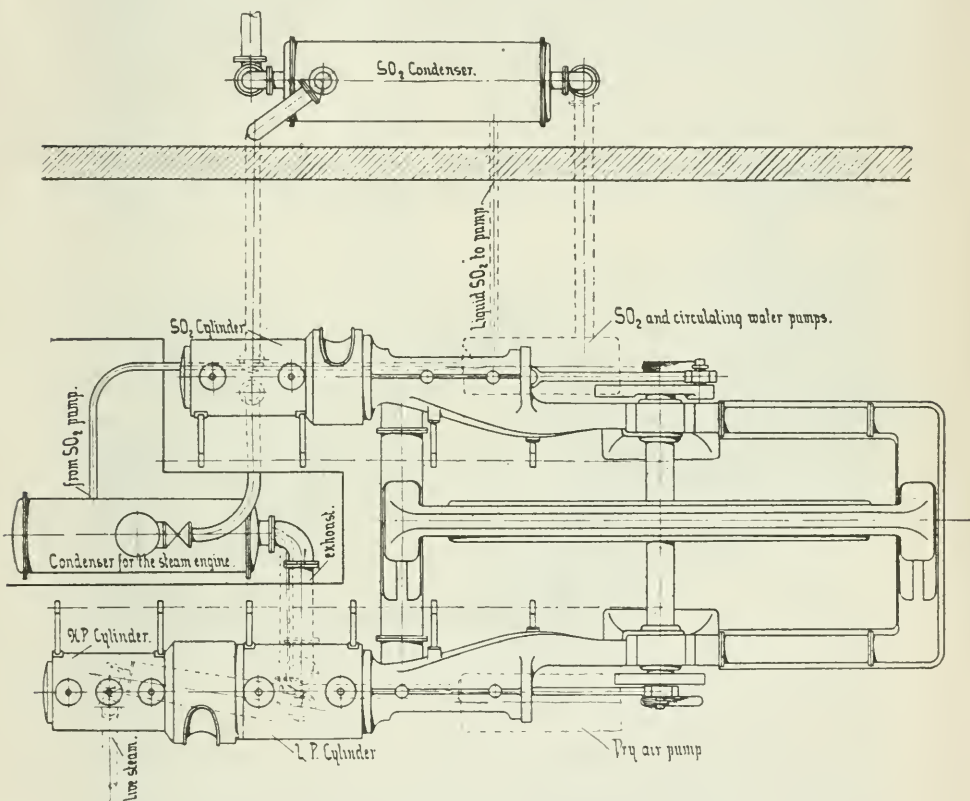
Binary engine. 1,600 I.H.P.—Plan.
